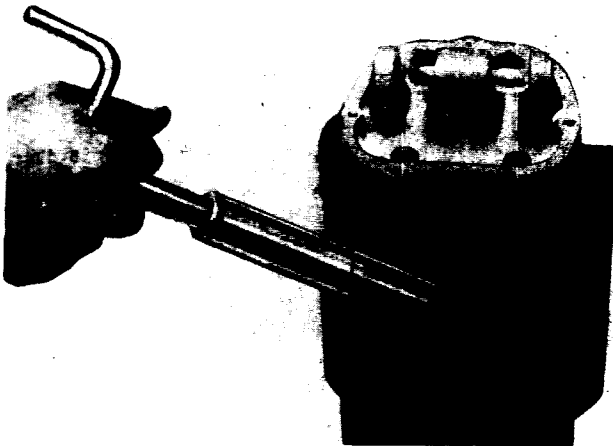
Installing Spark Plug Hole Heli-Coil Insert
